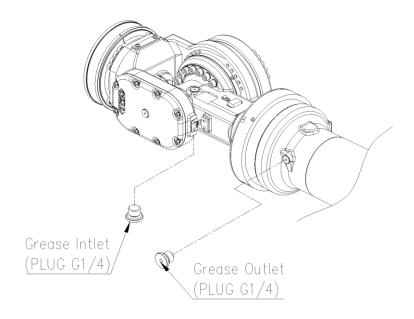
R2-Axis Reducer Grease Inlet/Outlet
